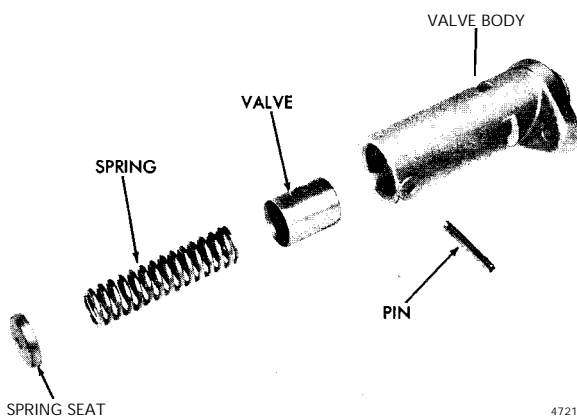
Oil Pressure Regulator Valve Details and Relative Location of Parts
